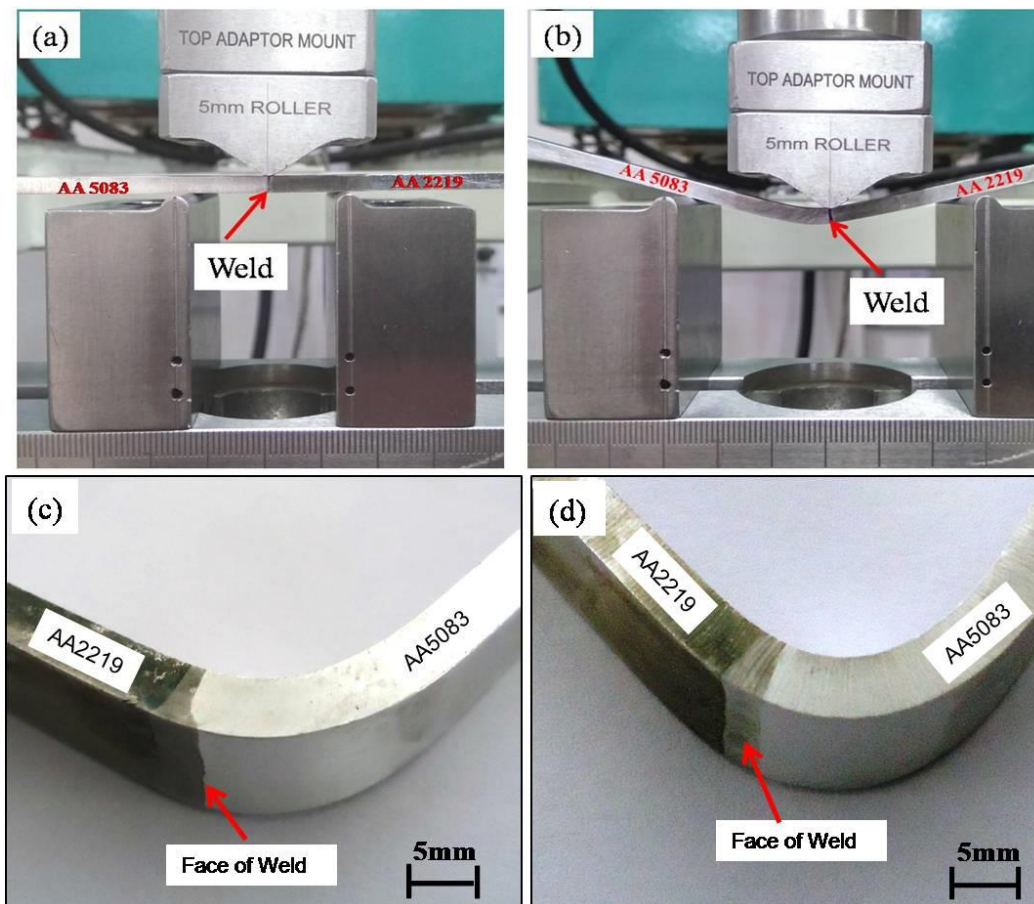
Three point face bend testing of weld joint (a) before bend test (b) during bend test (c) bend tested specimen of weld joint corresponding to highest BL (d) bend tested specimen of weld joint corresponding to lowest BL
